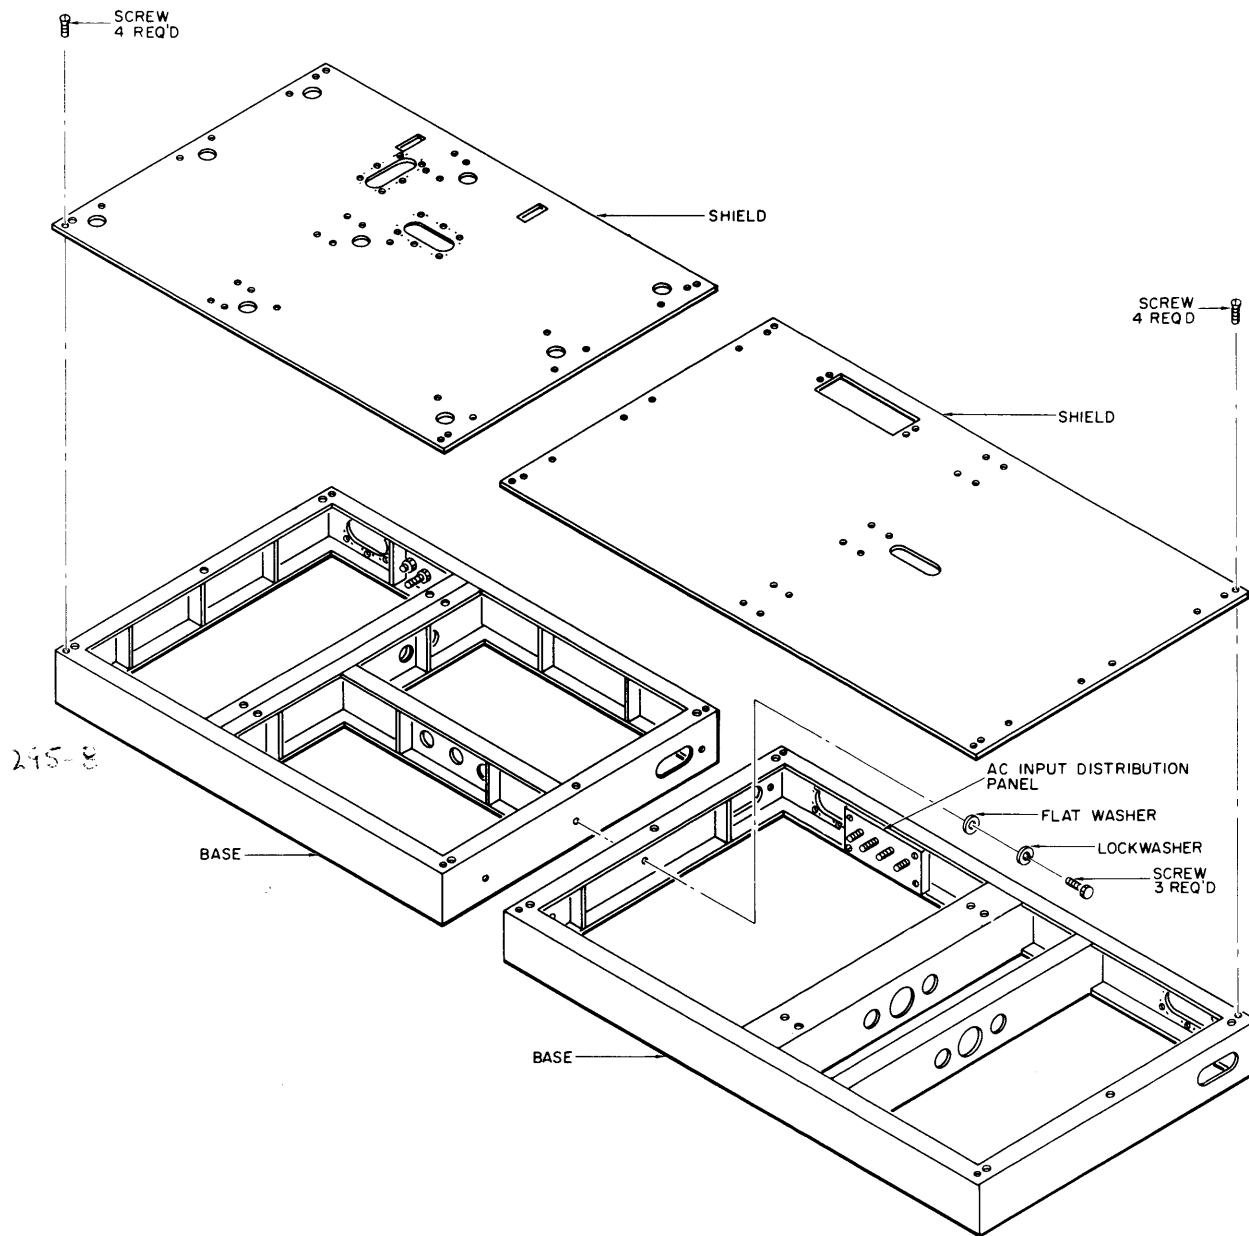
Base Assemblies for the First through Fourth Frames, Installation Diagram.
